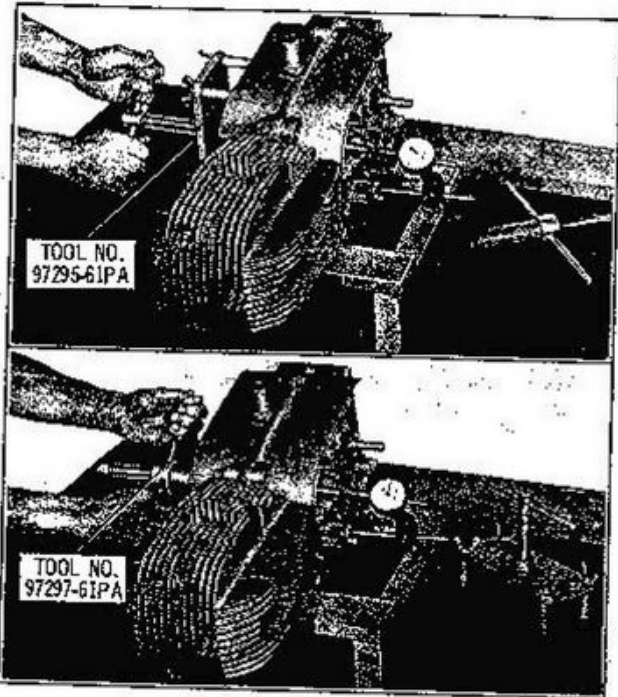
E-75. Checking Crankshaft End Play (1972 & Earlier)
